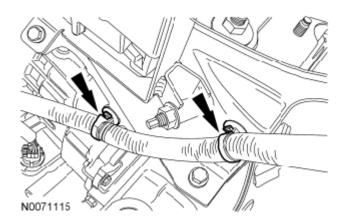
Locating Positive Battery Cable Wire Harness Retainer Courtesy of FORD MOTOR CO.
